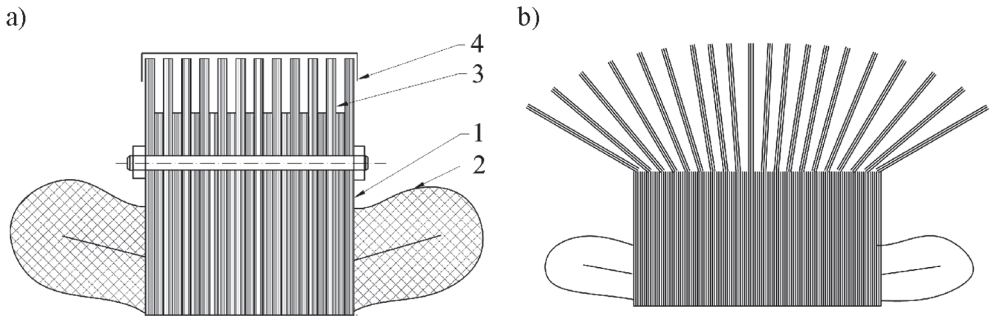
Inductor with radiator: a) formed by differentiated core sheets, 1 – core, 2 – end-winding connections, 3 – core sheet of various sizes, 4 – cover with vanes system, b) bending core sheet
